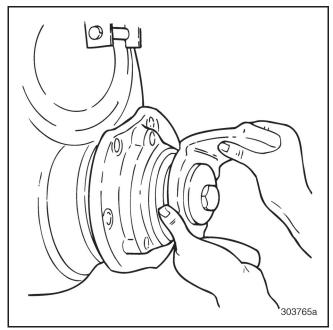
Removing Rear-Drive Shaft, Bearing Retainer and Output Yoke Assembly
